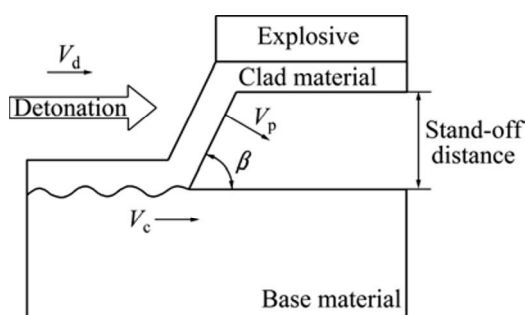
Schematic of experimental setup of explosive welding process
